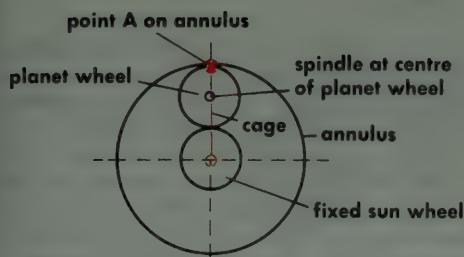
PLANETARY GEAR SET WITH FIXED SUN WHEEL
